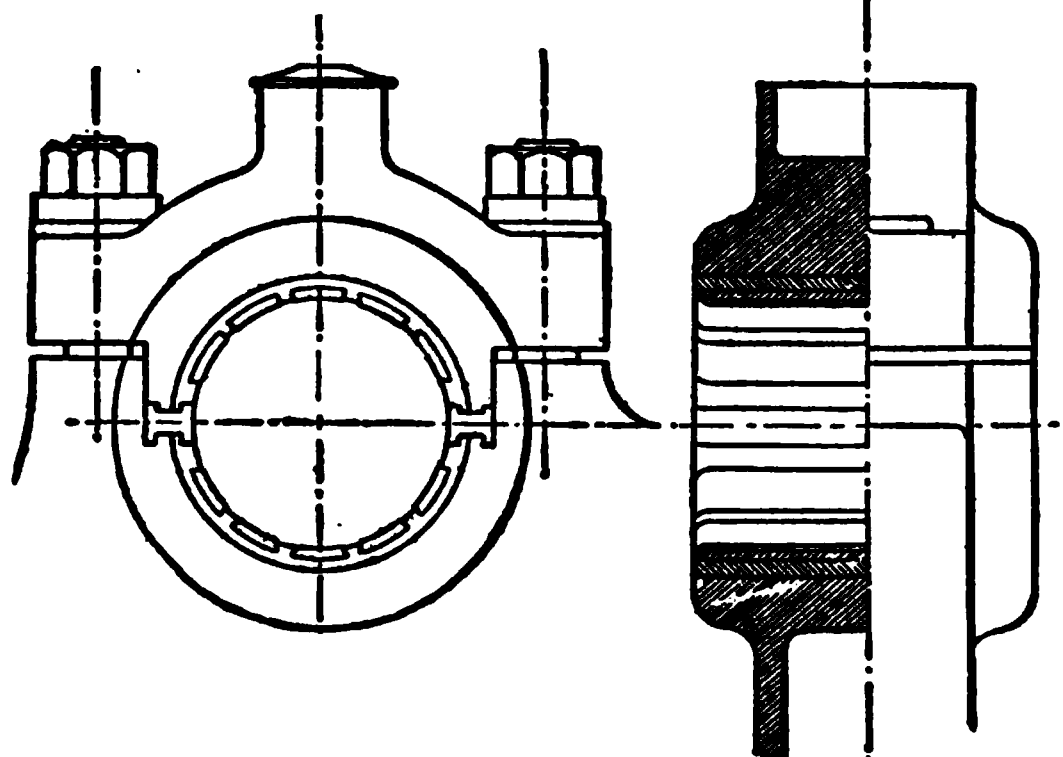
IMPROVED FORM OF CRANK-SHAFT BEARING.
